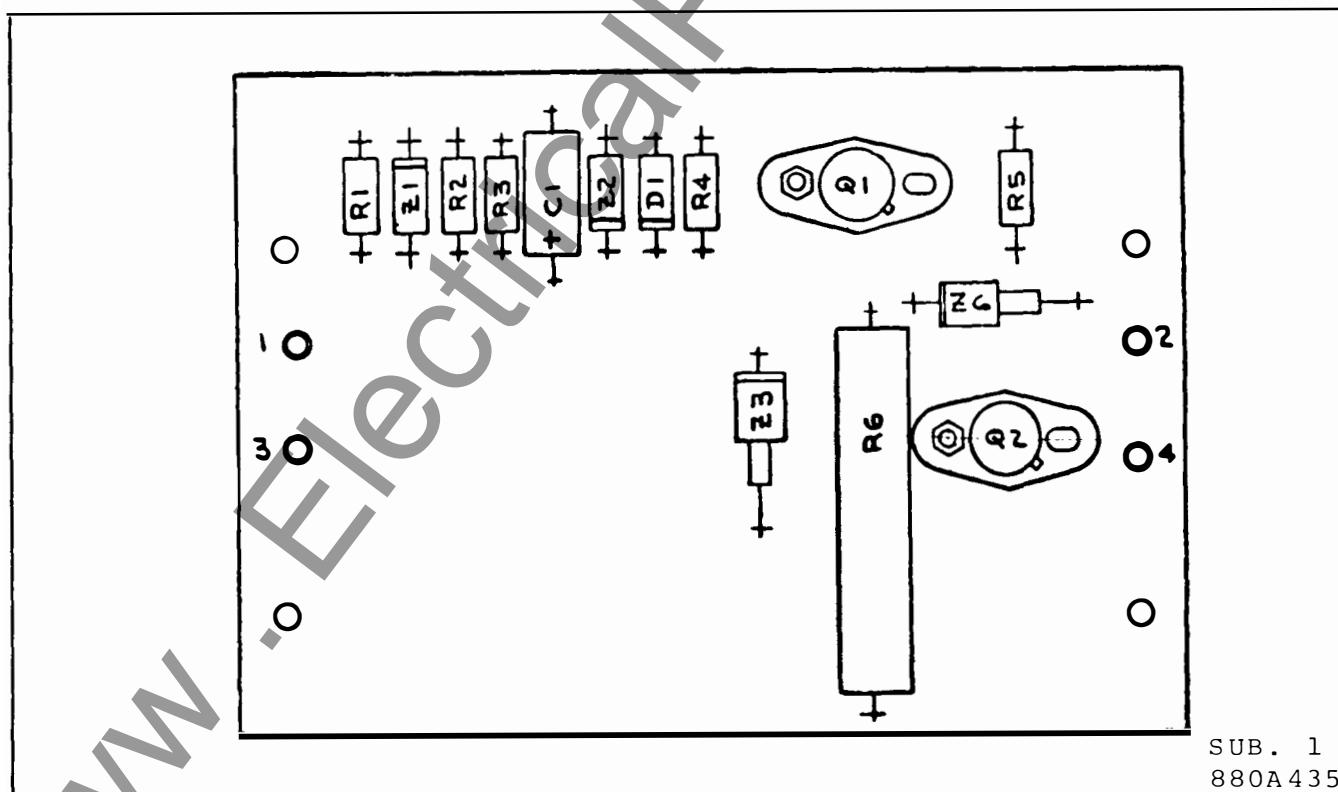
Component Location Single Input Buffer in FT-11 Case 125 VDC.
